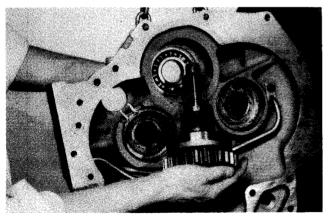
If input shaft is to be removed, tap on threaded end of shaft, remove input shaft, gear and bearing.
